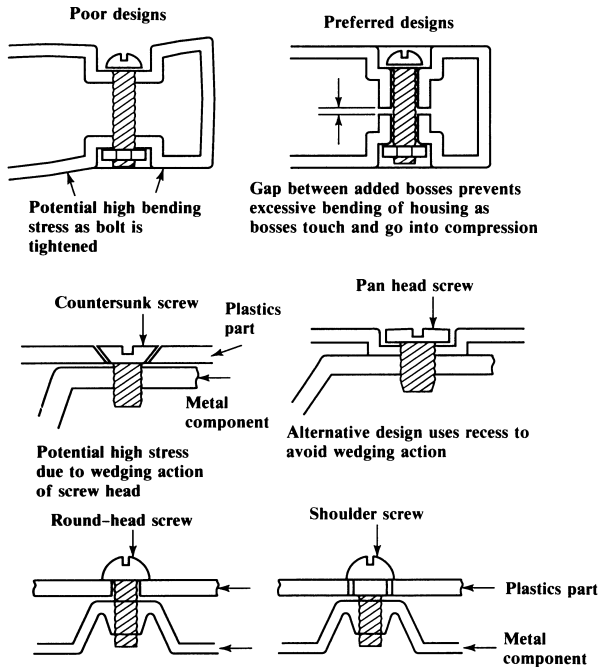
Examples of Poor and Good Designs Used for Assembly of Plastics Parts with Metal Fasteners
